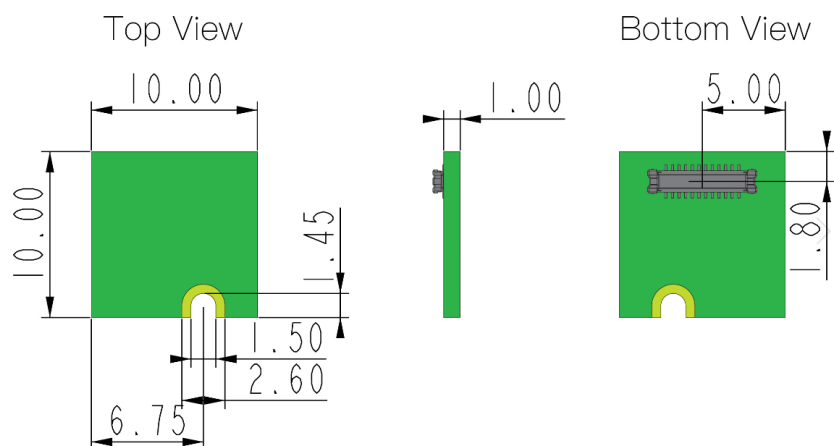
RAK1901 WisBlock Sensor Mechanic Drawing
